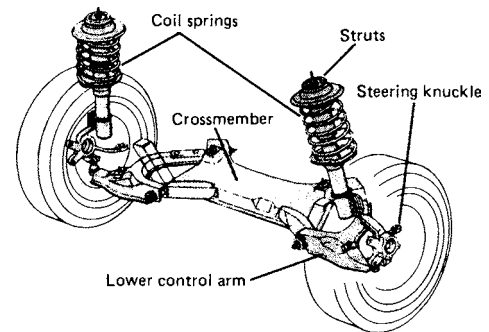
Typical MacPherson strut, coil spring front suspension for front-wheel-drive car. (Chrysler Corp.)
